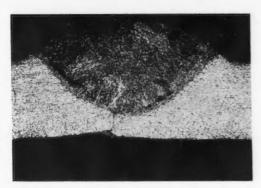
Examination of an apparently sound weld (10X) indicates that penetration was not complete and that the weld metal on the underside had flowed through the joint to create a brazed condition. Etchant 10 pct oxalic acid.
